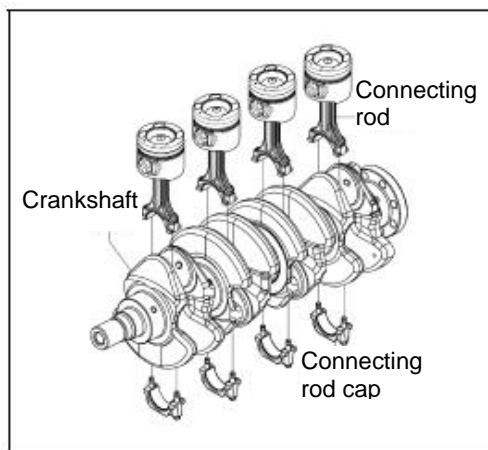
Crank and Connecting Rod Mechanism
